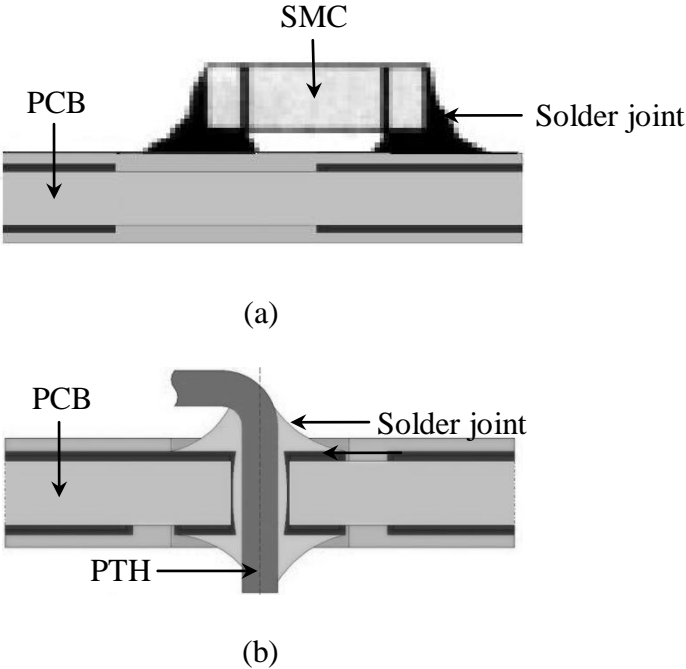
Types of solder joint (a) SMT (b) THT.
